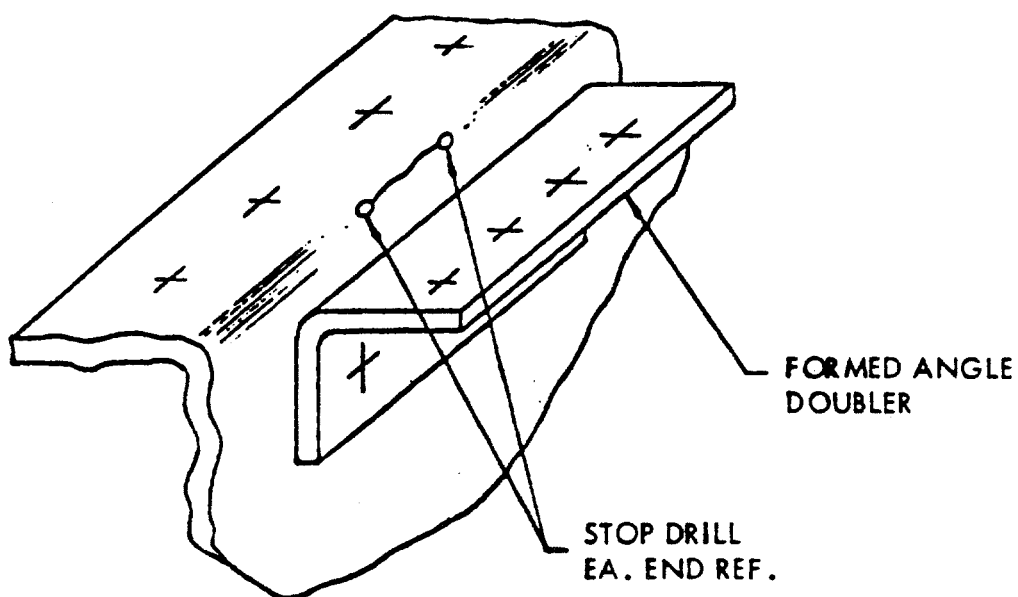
LENGTHWISE CRACKS ON BEND RADIUS OF FLANGES
